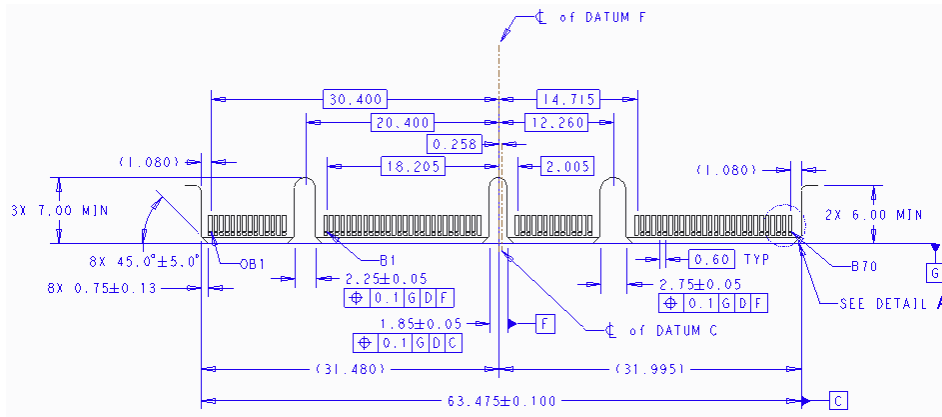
Large Size Card Gold Finger Dimensions – x32 – Top Side (“B” Pins)
